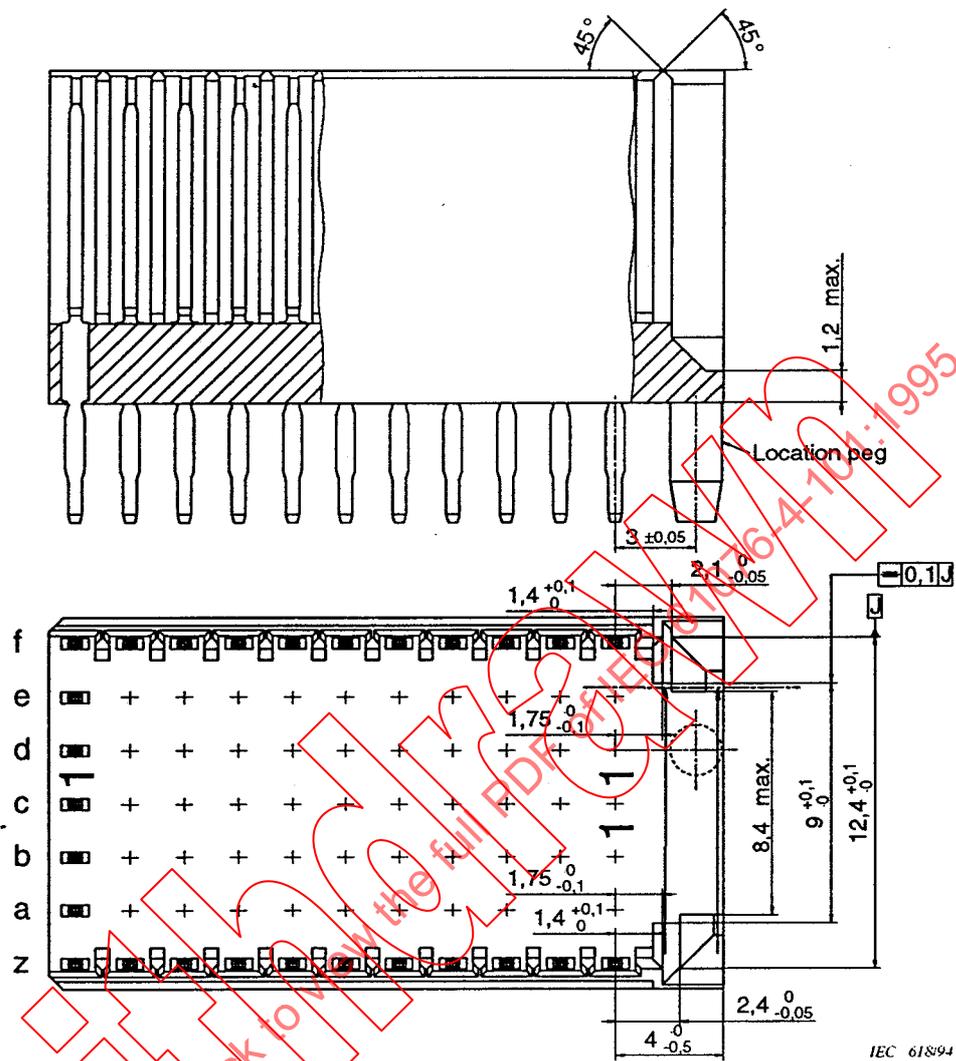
Dimensions of style C, fixed 25 mm extension module
